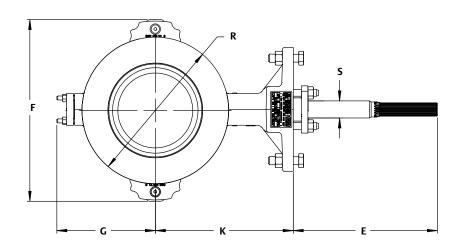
Dimensions for Fisher 8580, Wafer Style Valve (limited sizes)
